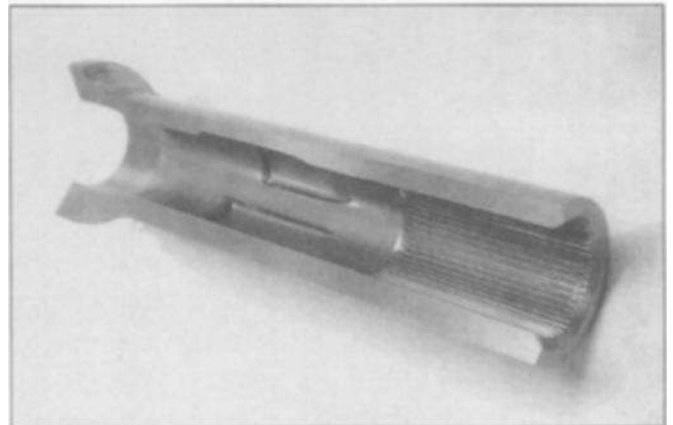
Example of a small, hollow cold forged automotive component produced on a radial rotary forging machine and sectioned to show the internal configuration. (Courtesy American GFM Corporation)
